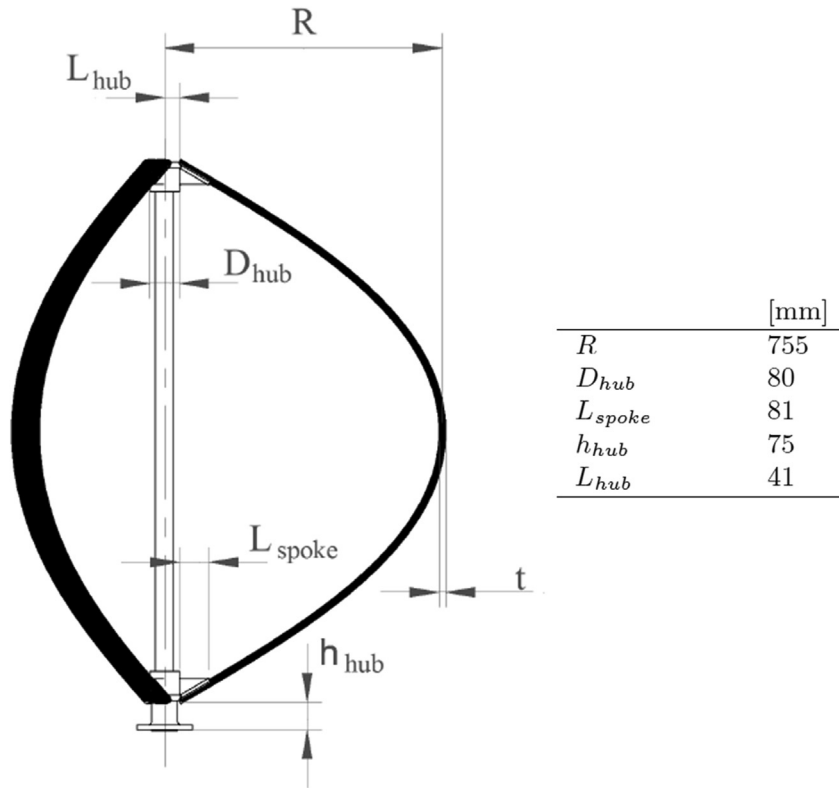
Quoted drawing (in mm) of the troposkien rotor.
